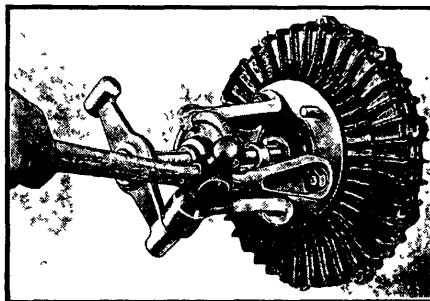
Removing hub and outer brake housing with special puller C-844.
